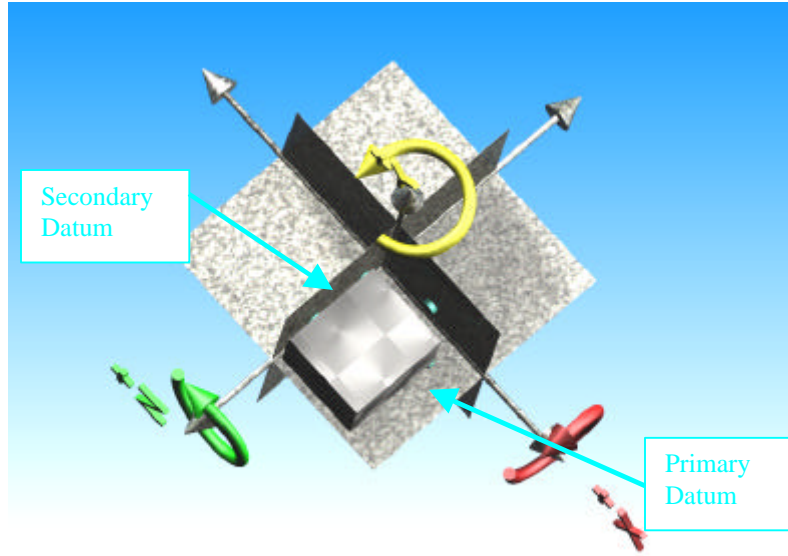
Illustration of coordinate system showing part with contact on primary datum.
